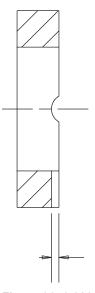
0.020 in. (0.051 cm) minimum groove height
